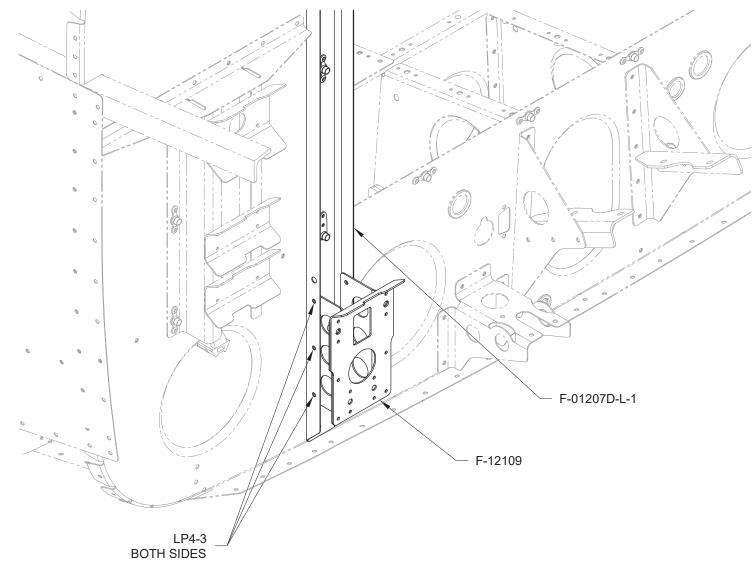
F-12109 ASSEMBLY INSTALLATION
